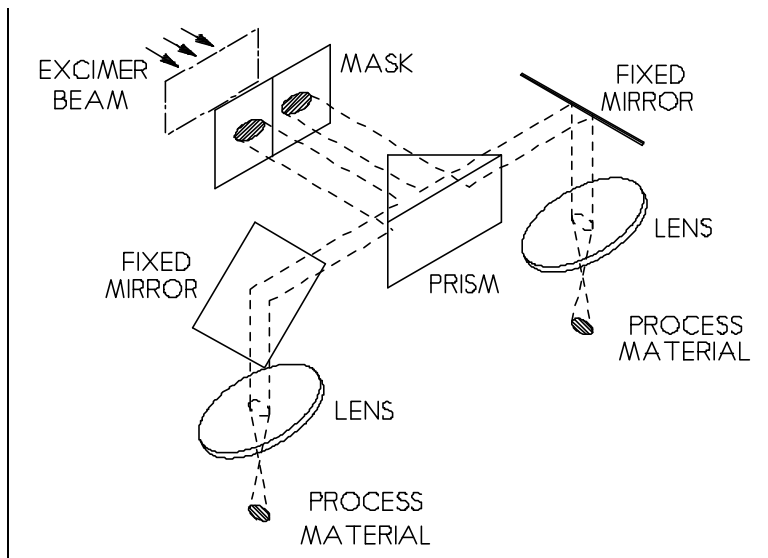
Geometric beam dividing using a single prism to separate the incident beam into two.
